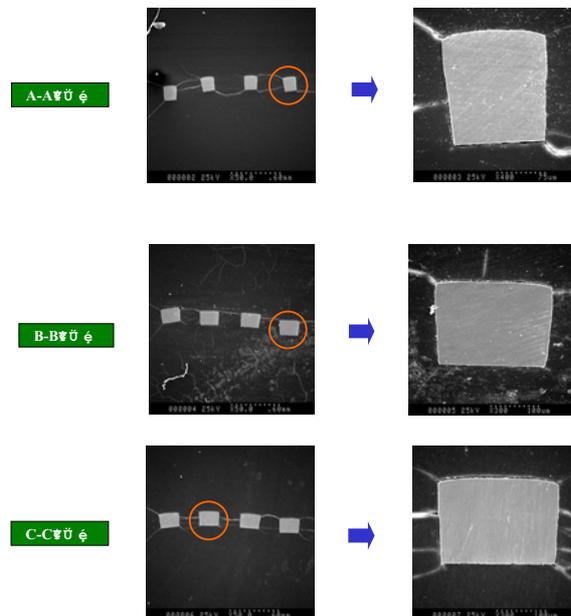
Section view of connector pin(SEM) in reverse stamping process
